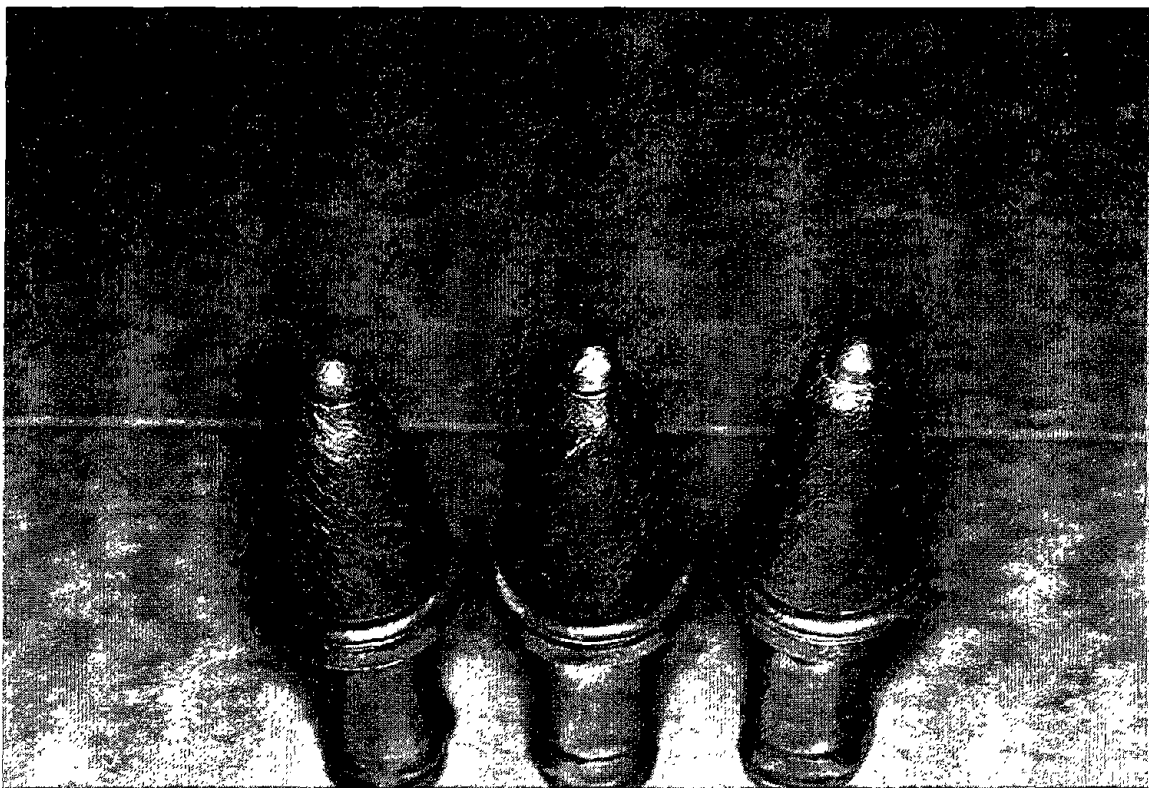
Sample bits from headgate drum after low-pressure cutting, 48 rpm: E: endring; C: center of drum; G: gobside
